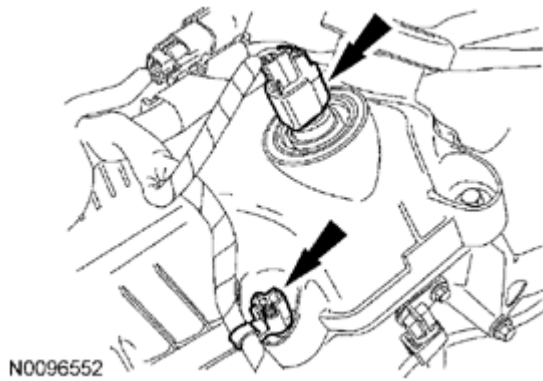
Locating RH Variable Camshaft Timing Electrical Connector And Wiring Harness Retainer
